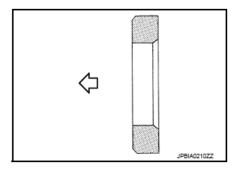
Identifying Pilot Converter Fitting Face Courtesy of NISSAN MOTOR CO., U.S.A.
